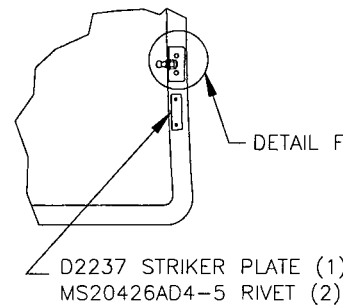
TYPICAL DOOR FRAME (AFT EDGE)
